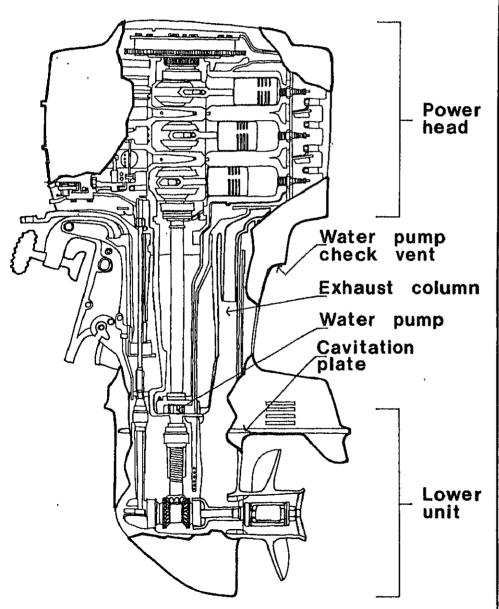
Cutaway drawing of typical internal combustion, reciprocating outboard engine (Otto Cycle).
